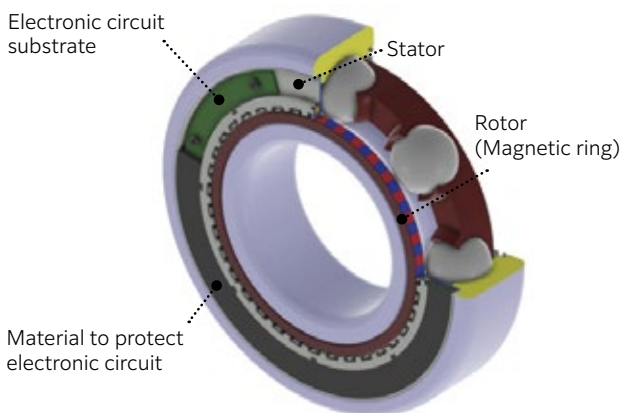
Structure of Sensor Integrated Bearing “Talking Bearings™”
